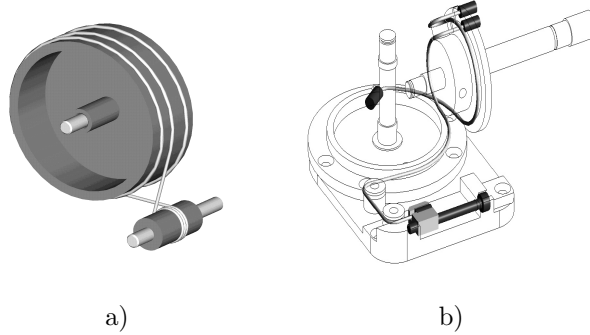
a) Cable transmission system b) Cable drive equivalent of bevel gear.
